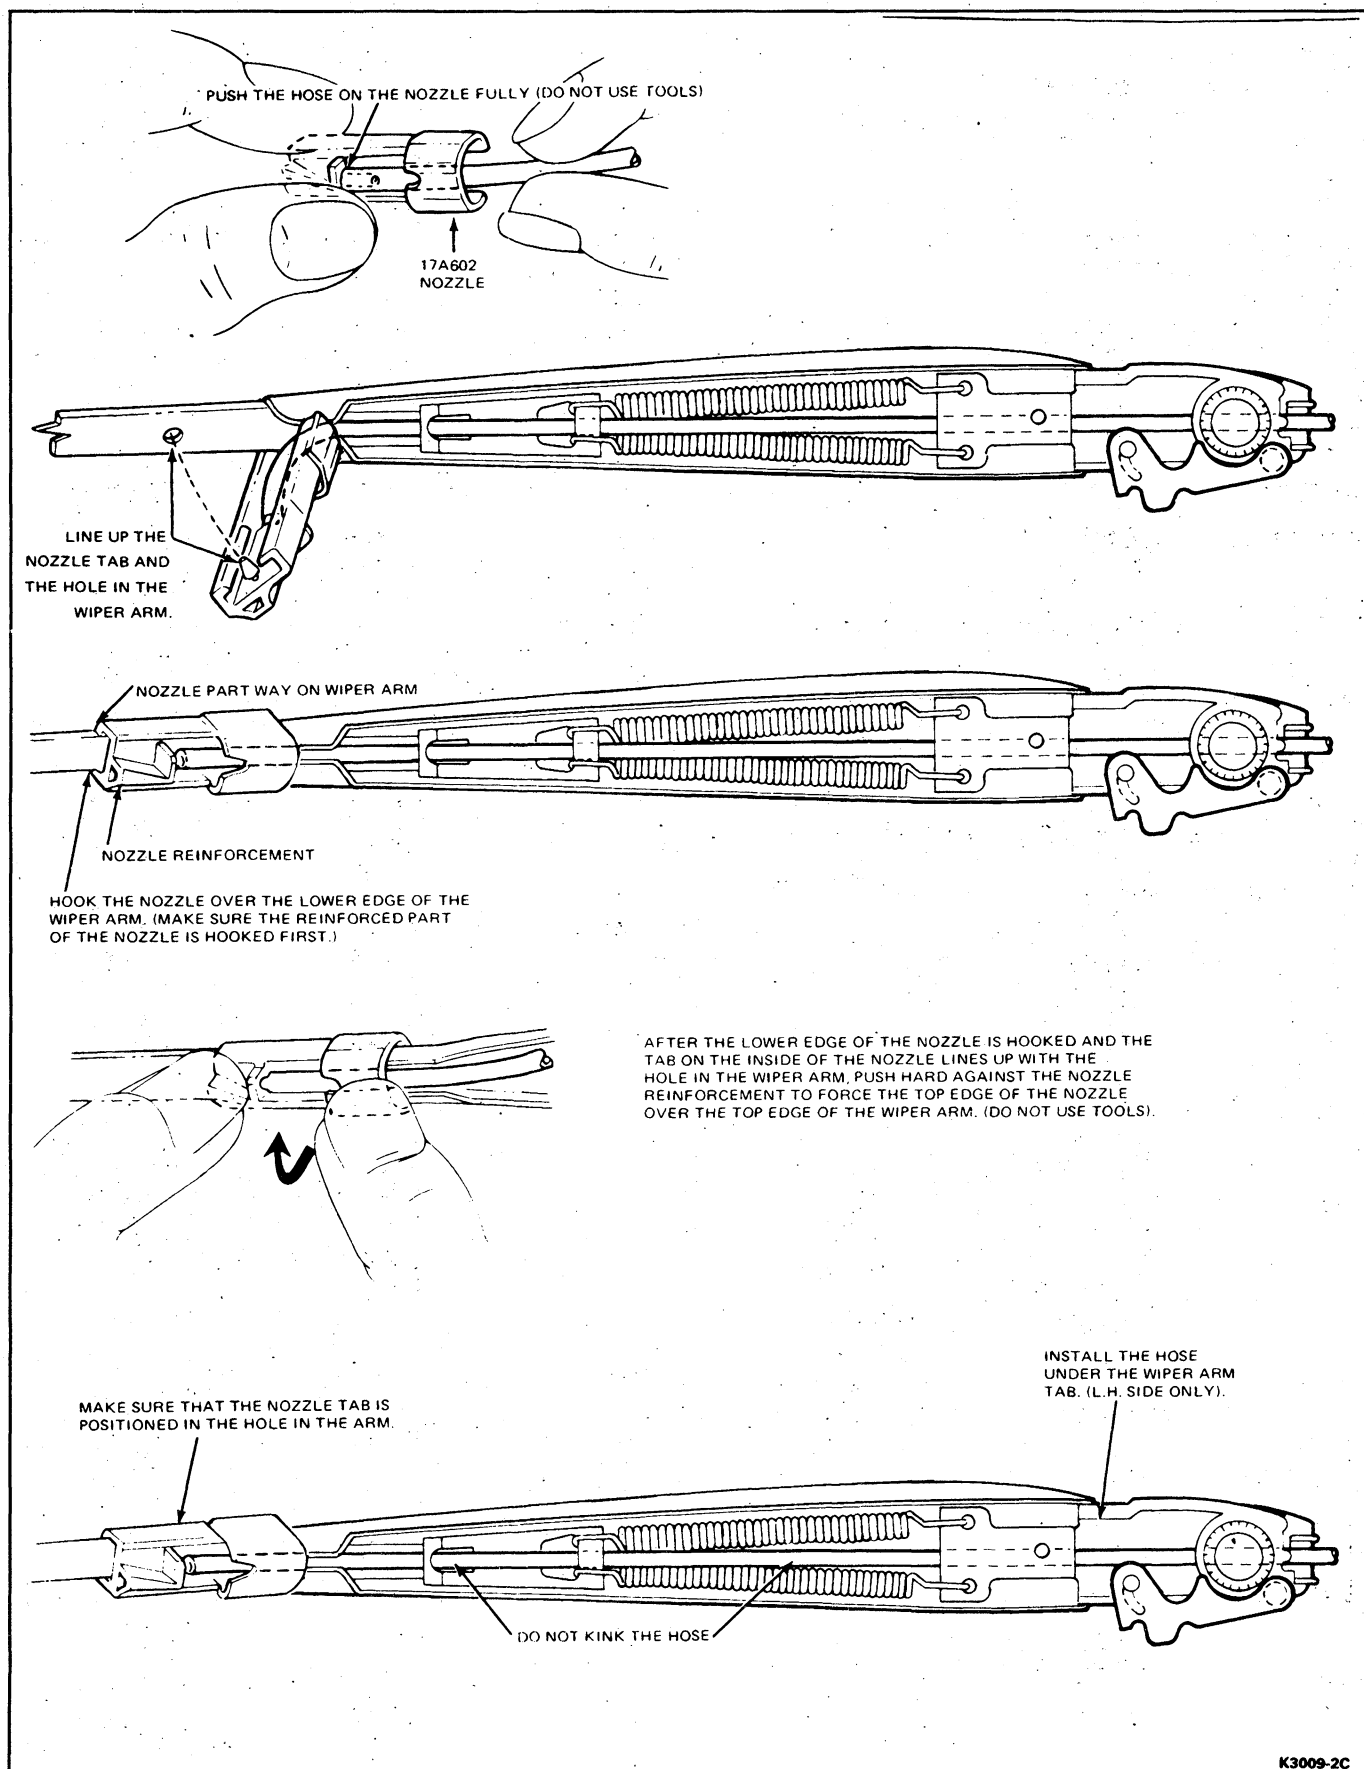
Windshield Washer Hose Installation—E-150—E-350
